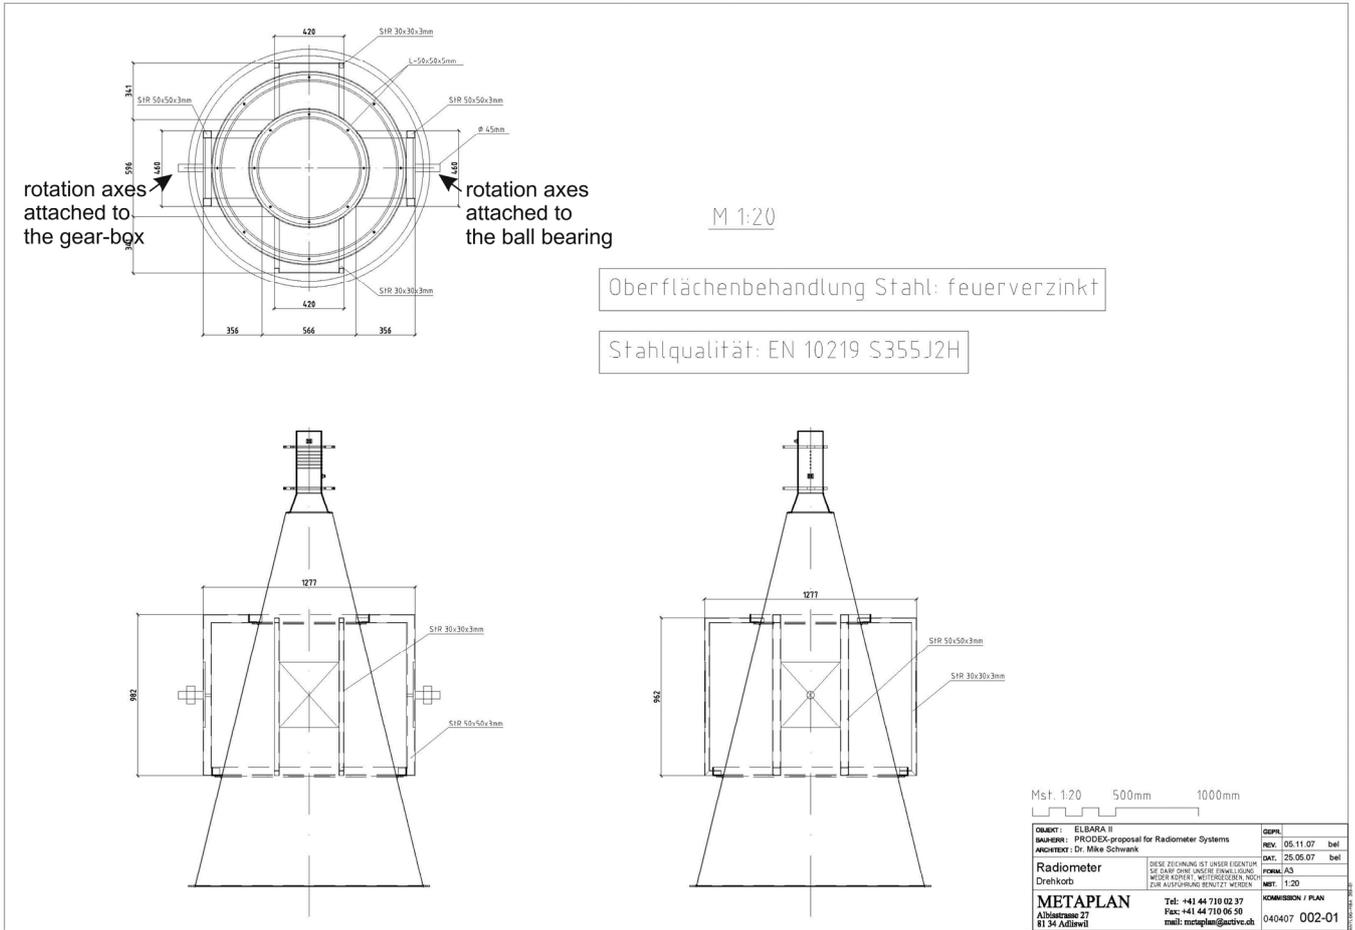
Mechanical drawings of the system components provided by GAMMA (antenna (cone, feed, holder), radiometer electronics) and IA-PAS (scaffold, elevation tracker). The ball bearing and the gear-box holding the rotation axes will be screwed to the top mounting plate of the scaffold during the assembly of the ELBARA system in Poland to avoid manufacturing tolerances.
